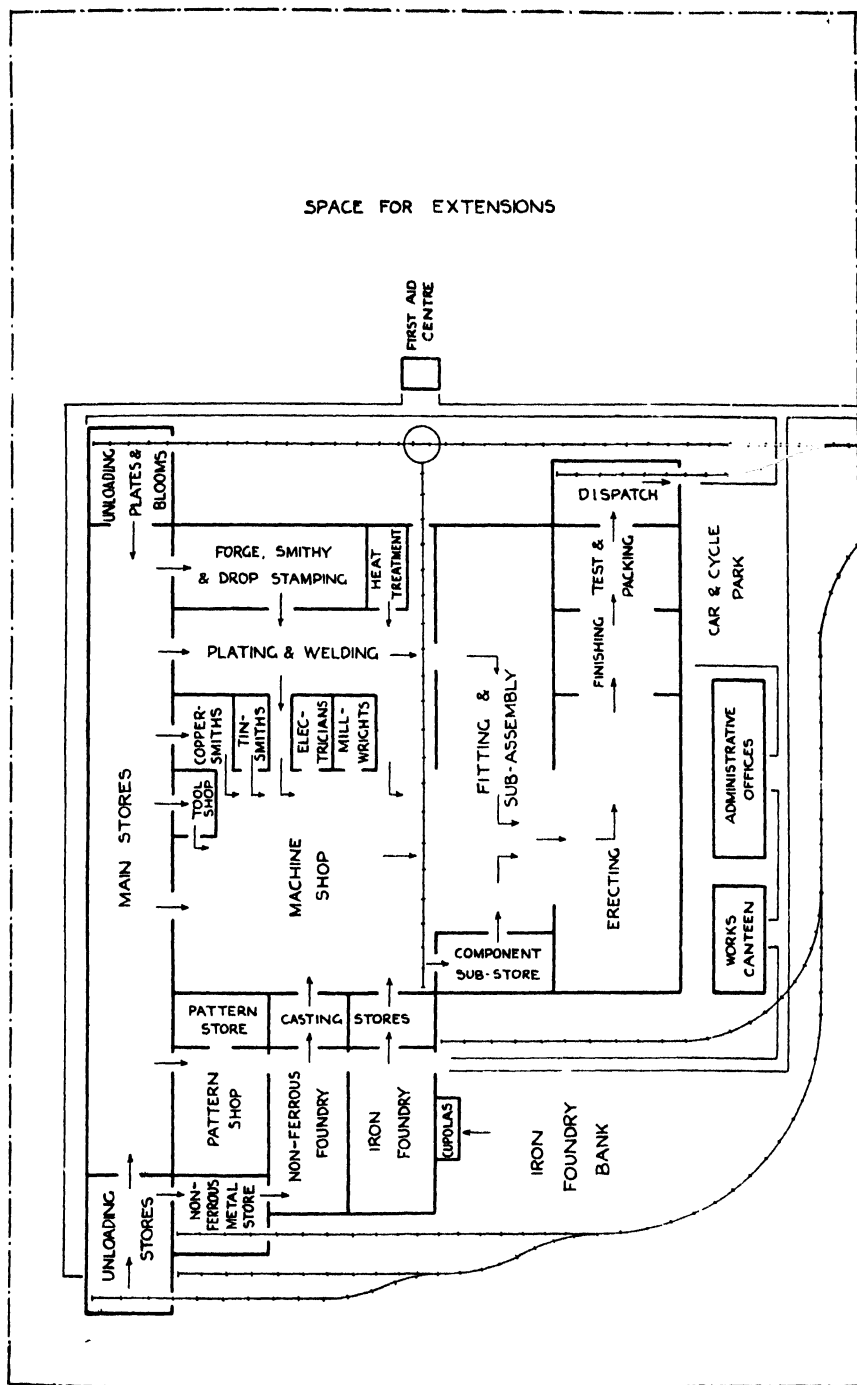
BLOCK PLAN OF IDEAL FACTORY LAYOUT
